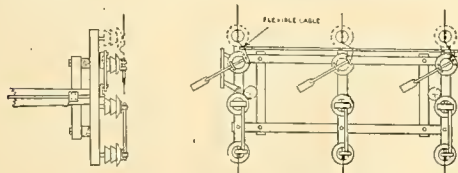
OUTDOOR SWITCH AND FUSE FOR SMALL SUB-STATIONS.
